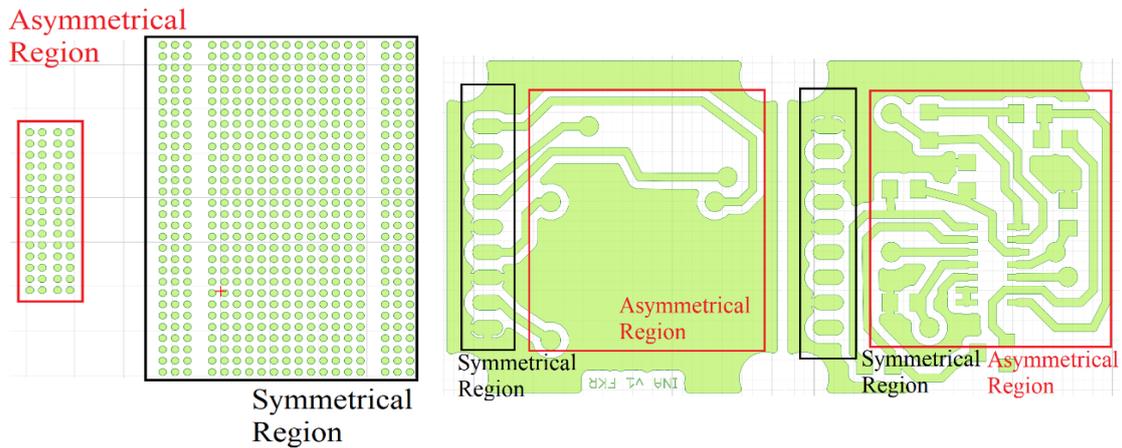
High-resolution image of the PCB printed using the removal feature
